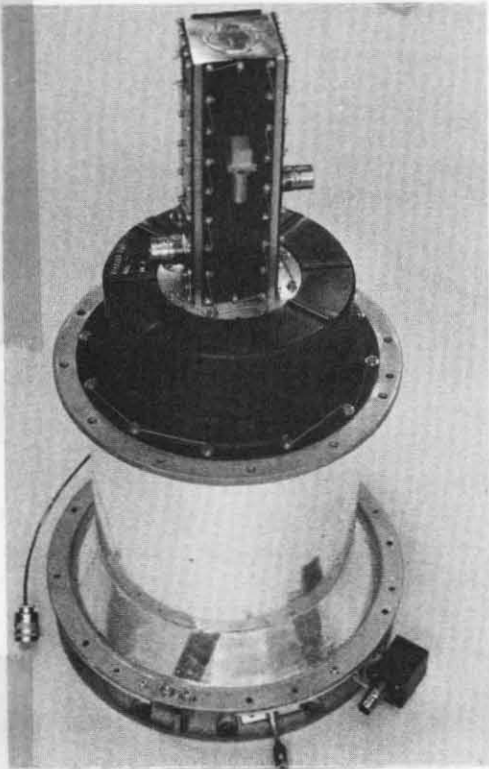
TACSAT Beryllium Despin Bearing Assembly
